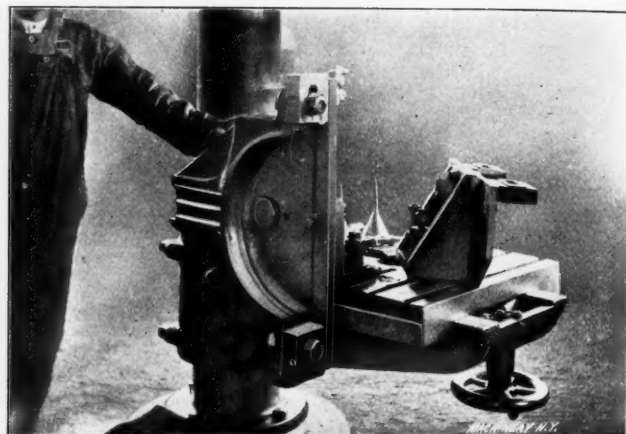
Indexing Fixture for Holding Eccentric Straps while Drilling Oil and Set-screw Holes
